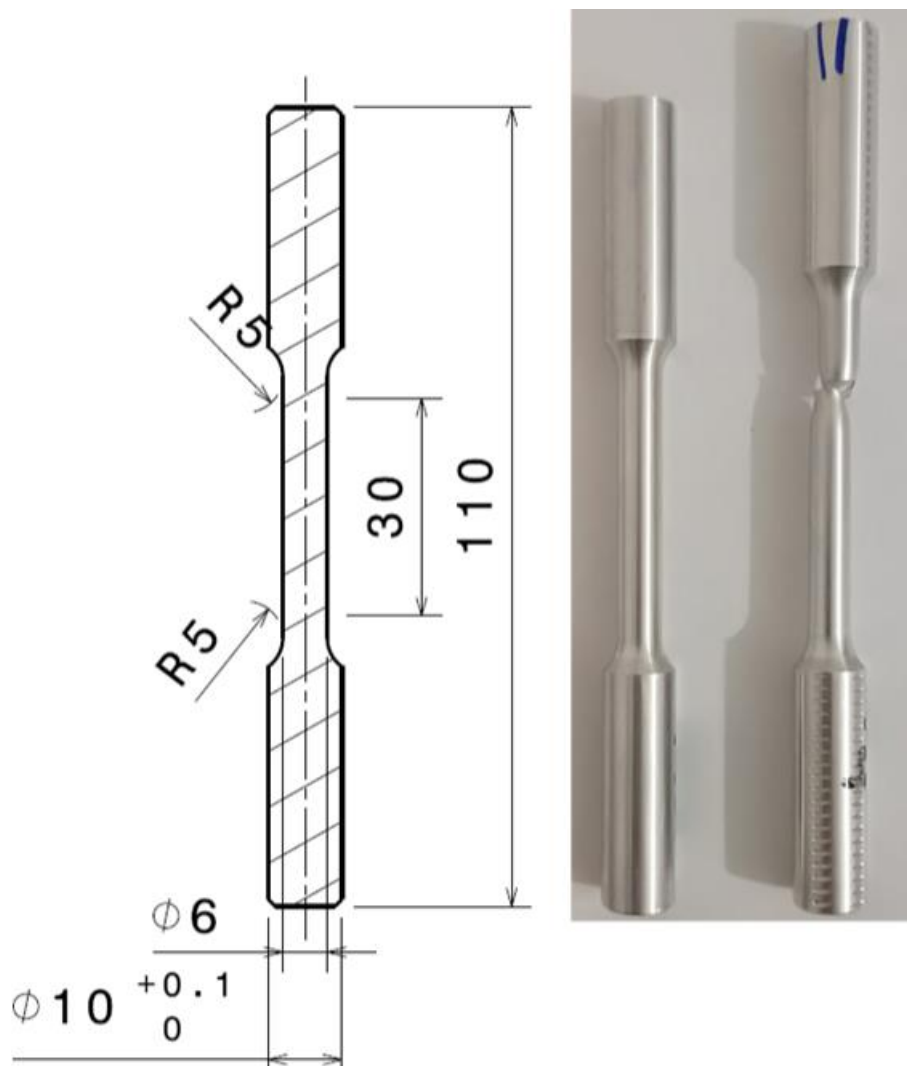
DIN 50125 Tensile Test Standard Sample Geometry
